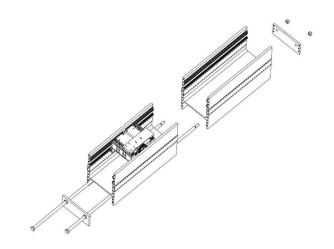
Two Lego-like joined bed structure hosting one movable cross-table
